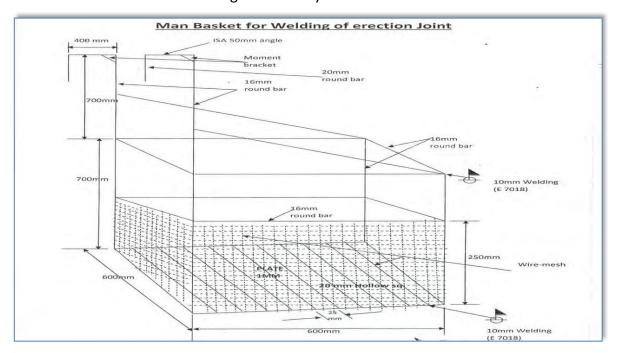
Man Basket for Welding Erection Joint
